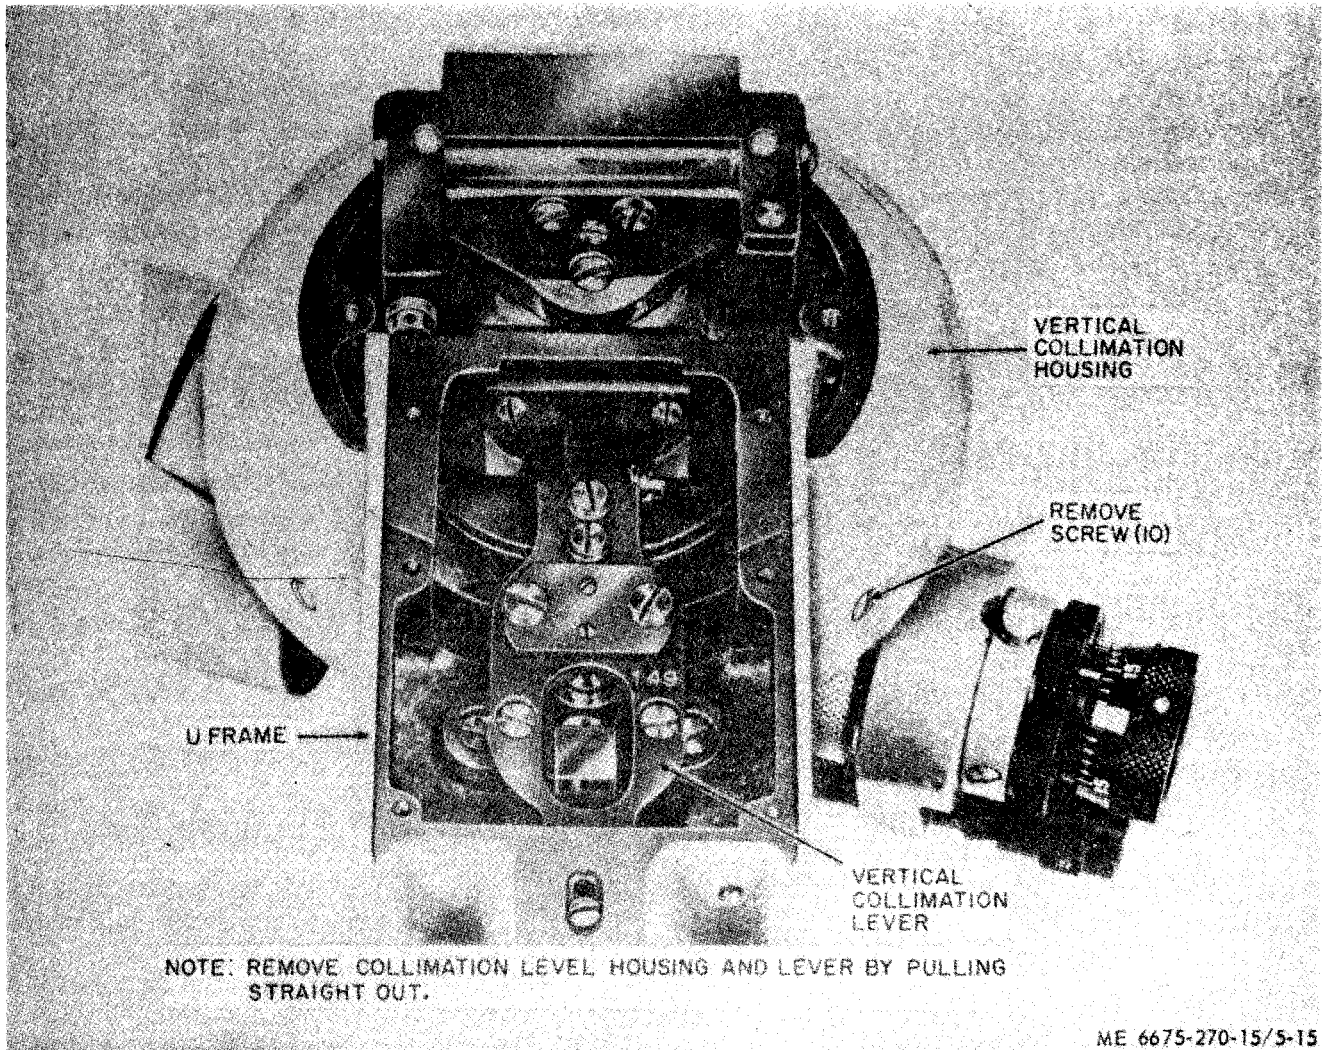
Vertical collimation housing and vertical collimation lever assemblies, removal and installation.
